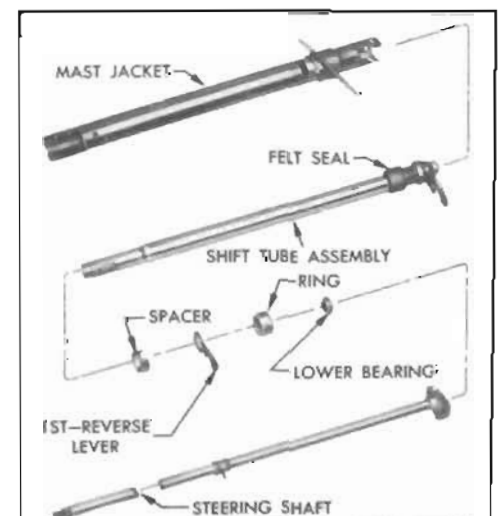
Disassembly of Lower Portion of 3 Speed Transmission Mast Jacket
